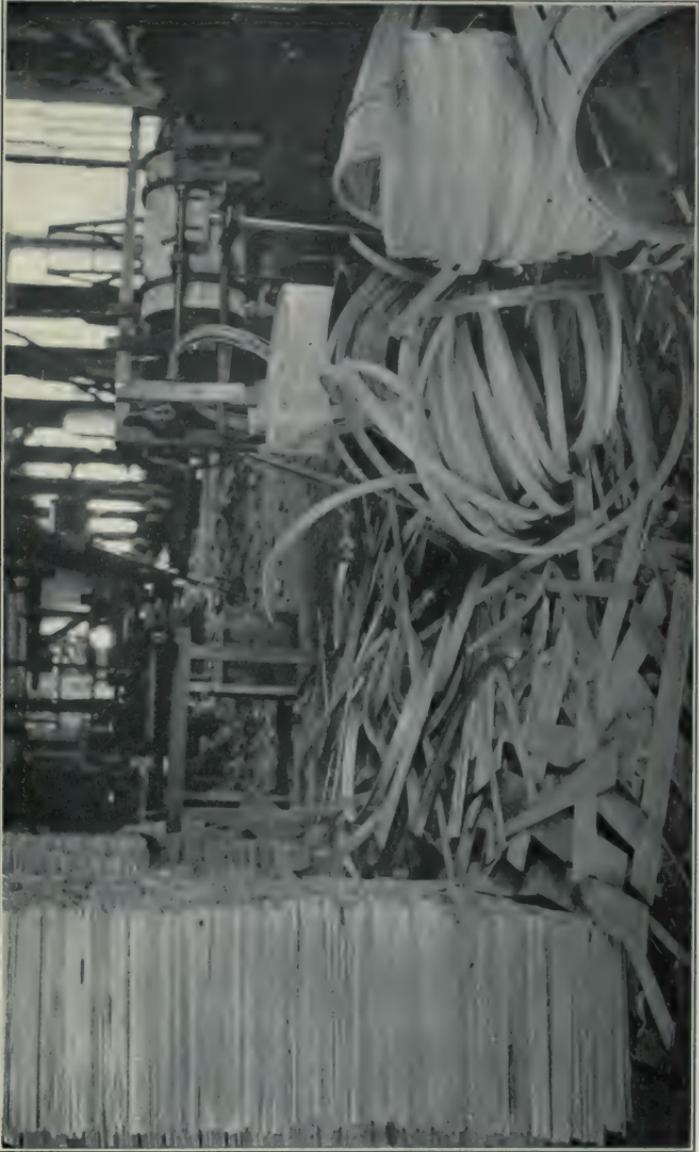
Parts of Vegetable Barrels and Their Manufacture.
